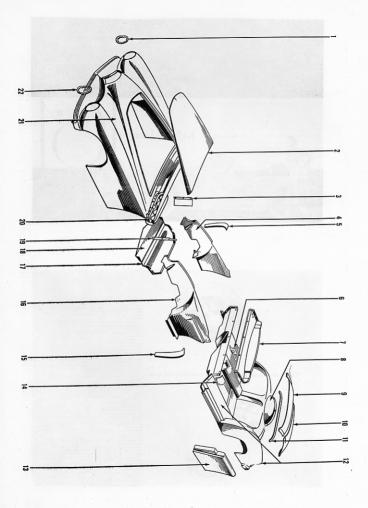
BODY SHELL - EXPLODED VIEW
